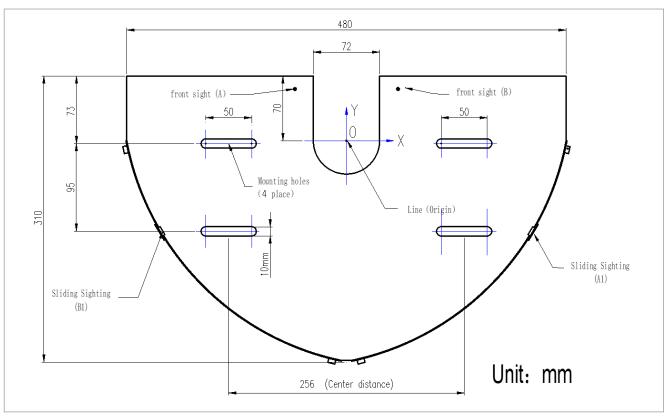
Plane Dimensions Drawing of Manual Sighting and Reading Table
